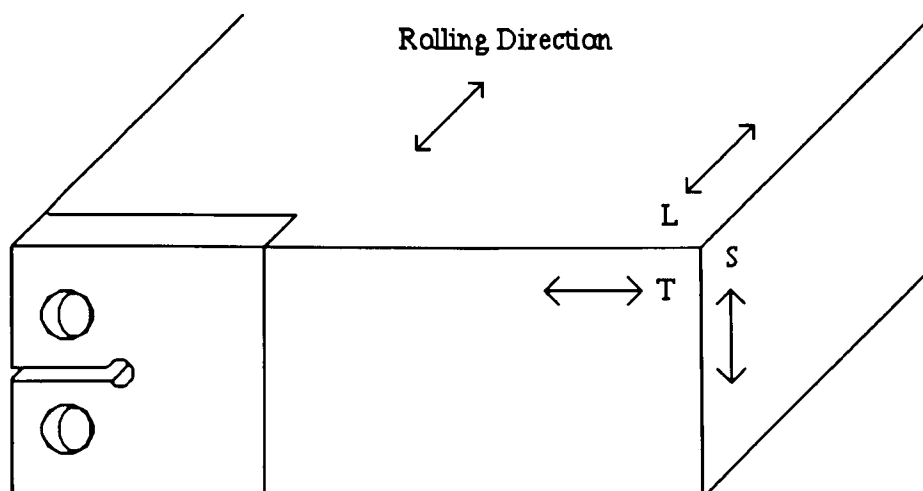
Blunt-notch type fatigue crack initiation specimen layout.
